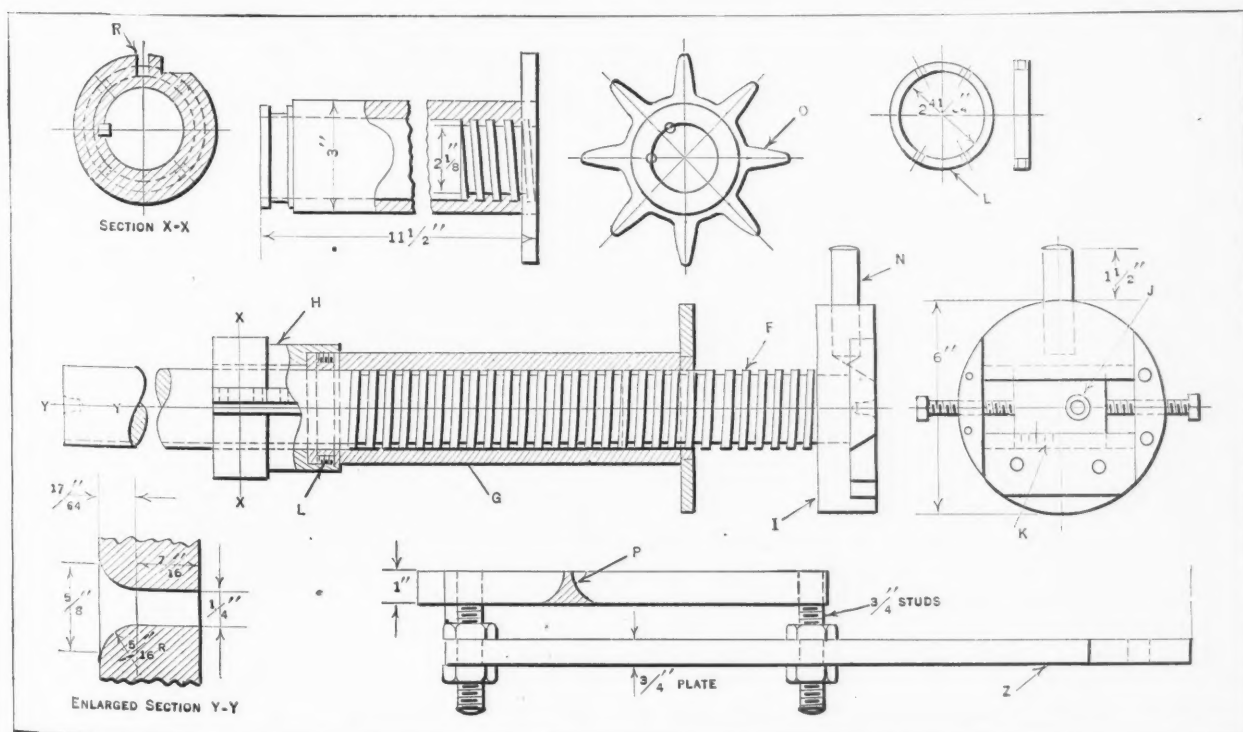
Details of Important Parts of Taper-boring Bar Shown in Fig. 1
